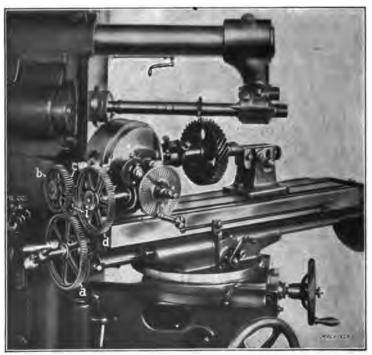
Cutting the Teeth of a Spiral Gear in a Universal Milling Machine
